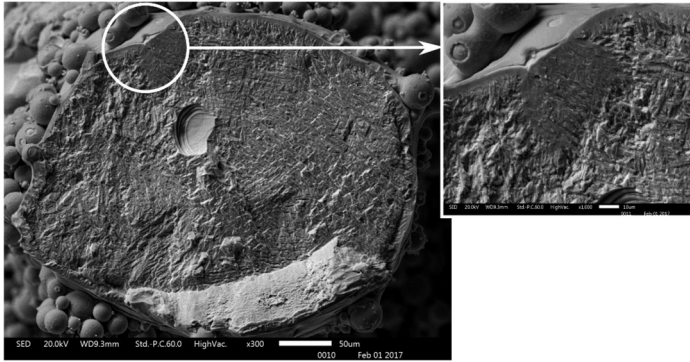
Fractured section of a strut of an as-built CYL-S specimen after termination of the fatigue test. Note that the fatigue crack nucleated on the surface (detail) and not at the pore.
